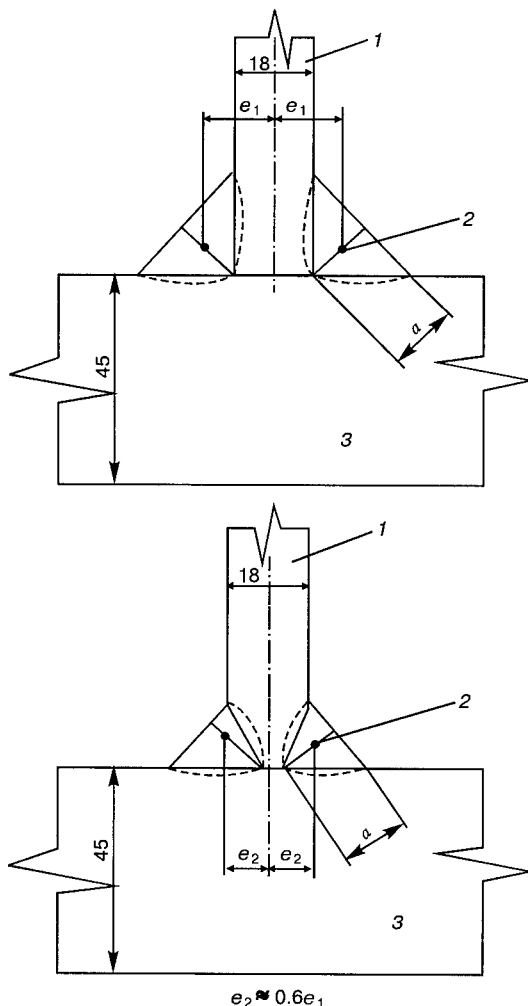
Variants of arrangement of the welds near the cross-piece: 1 — web plate; 2 — centre of gravity of the deposited metal and point of the effect exerted by shrinkage forces; 3 — cross-piece; a — height of the fillet weld; l_1 and l_2 — distances from the axis of the double-T beam web to the centre of gravity of the weld
